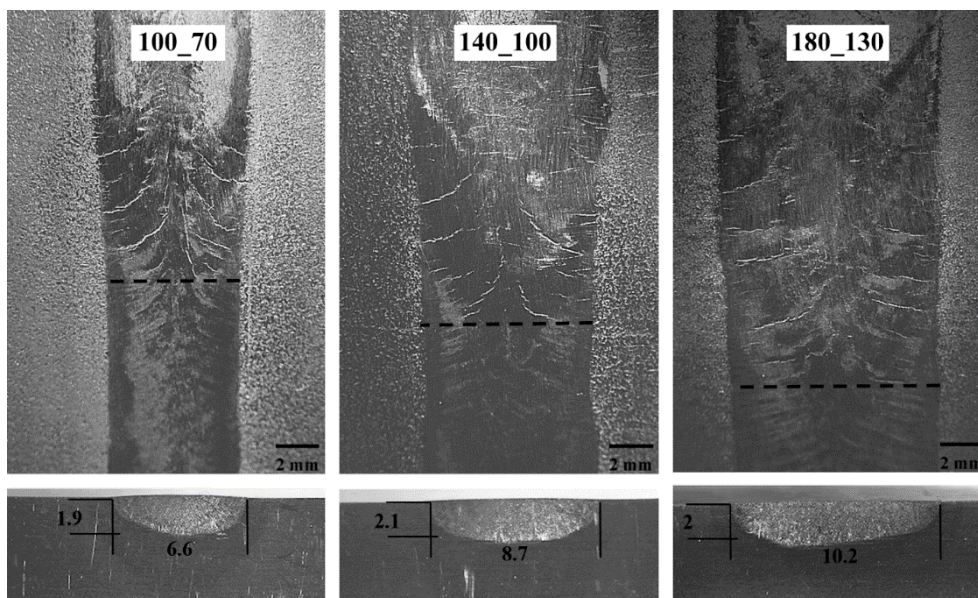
Top and transversal views of the welds including weld bead width and penetration values.
